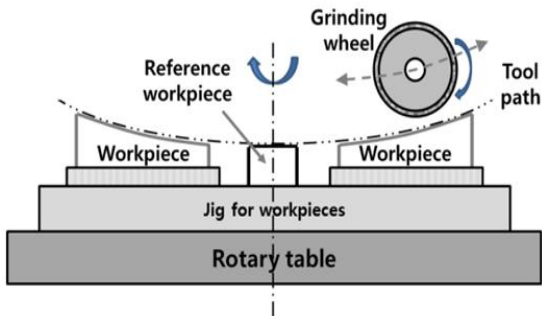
Schematic diagram for profile machining of reflecting mirror using reference workpiece
